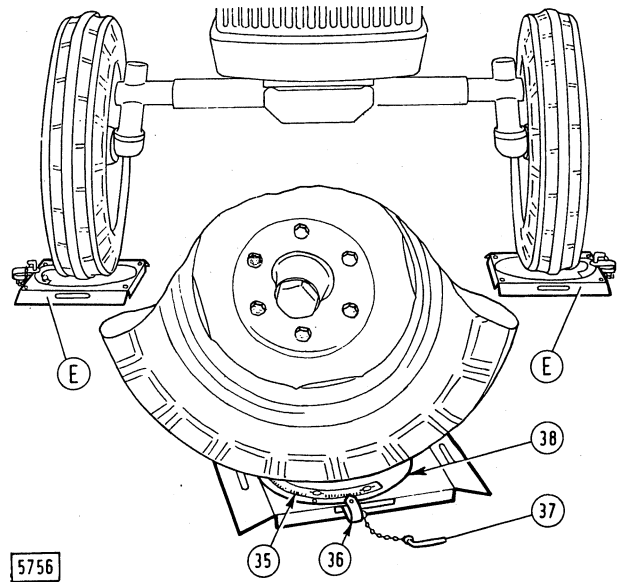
Checking the steering radius by means of the apparatus Ap 5106/P (E).
